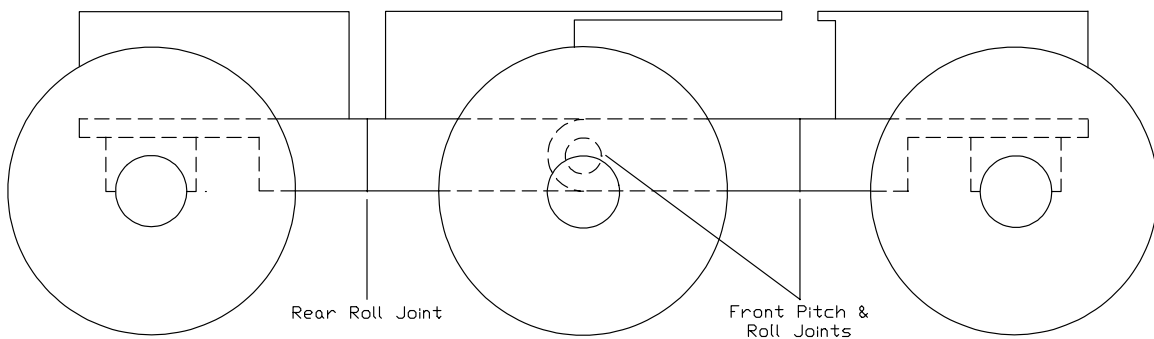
Six Wheel Articulated Rover (right-hand side view)
